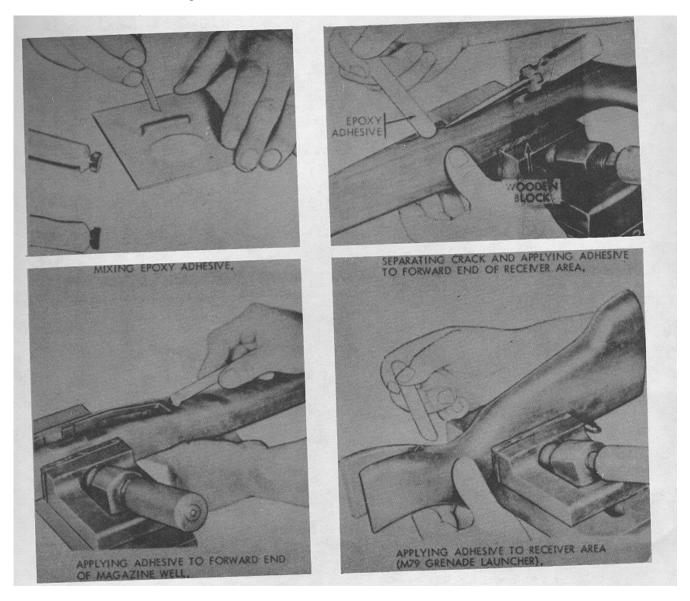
Repairing damaged, wooden stocks with epoxy adhesive (M1, M2 Carbines, M1, M14 Rifles and M79 Grenade Launcher).
